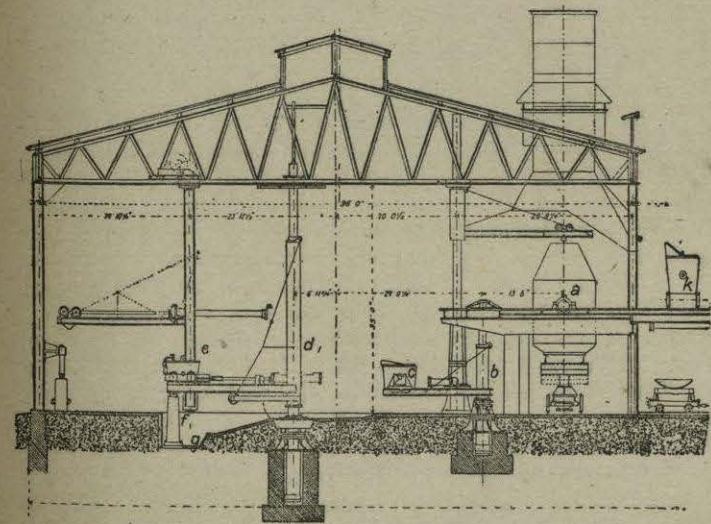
Section through the Bessemer Shop Cambria Iron Works, 1890, showing Converter with Receiving Crane and Transfer Central Casting Crane—(a) Converter; (b) receiving crane; (c) receiving ladle; (d) transfer casting crane; (e) casting ladle.
